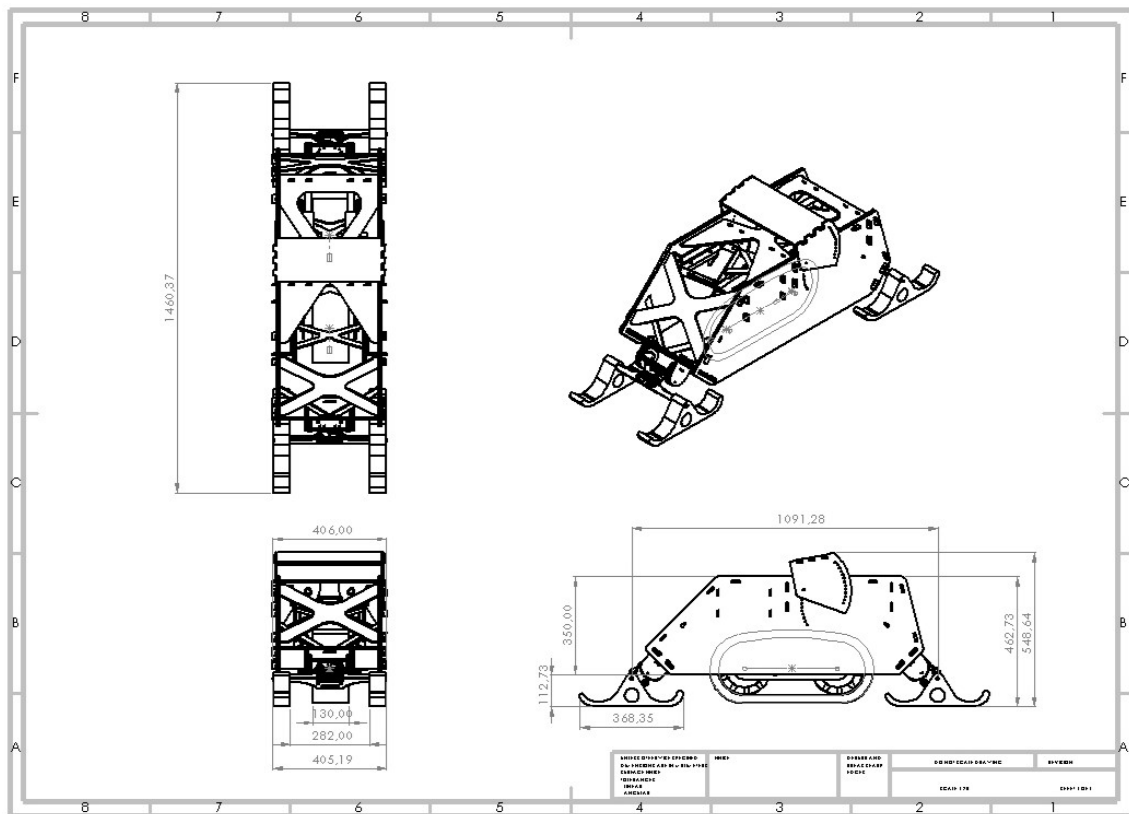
Engineering drawing of test rig CAD-model with dimensions.
